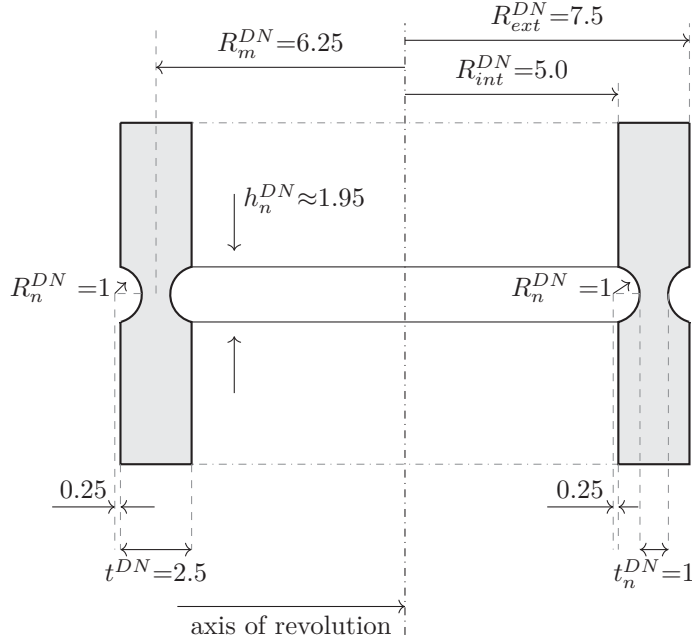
Nominal notch geometry for double notched tube - cross-section cut (dimensions in mm)
